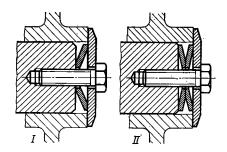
Cap screws turned into shaft end and locked by Belleville spring washers
